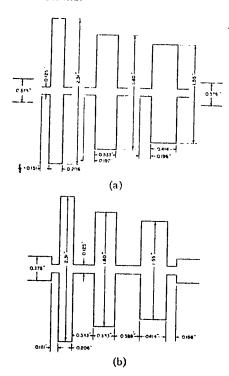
A three-section waveguide filter, (a) before assembly and (b) after assembly. ( $f_1 = 3,000 \, \text{Mc}$ ,  $a = 2.75 \, \text{inches.}$ )
